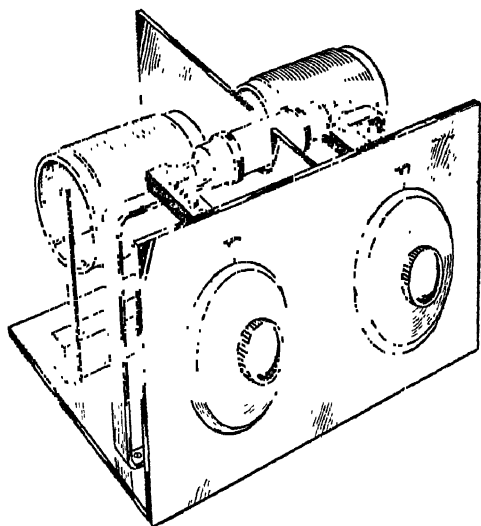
The Shielding Arrangement for One Stage H.F. Front, bottom and centre-piece are of metal
